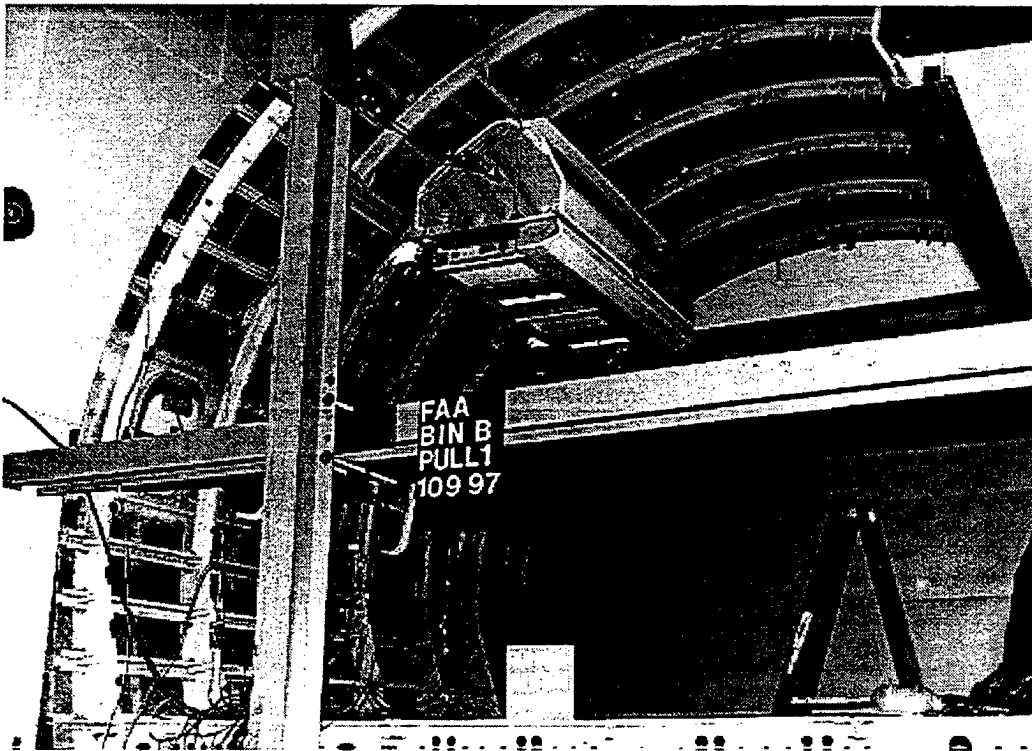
PRETEST BIN B AND TEST FIXTURE FRONT ANGLE OVERALL VIEW
